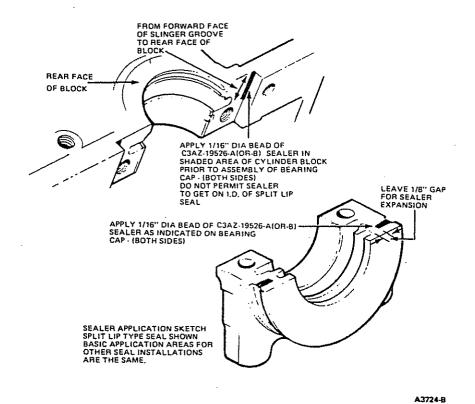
Applying RTV Sealer to Main Bearing Cap and Block — Typical for 6 and 8-Cylinder Engines
